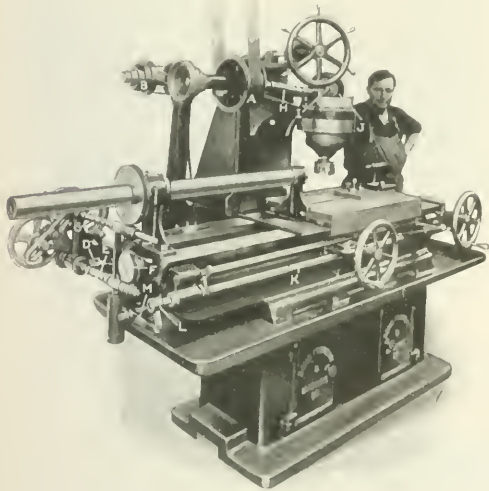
Bowen Milling Machine built by Bond Foundry & Machine Co.
